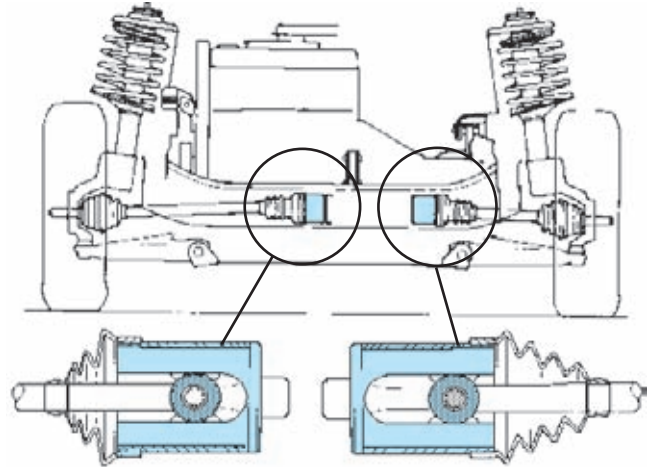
The enlarged views of the inner CV joints show that the engine and transaxle are misaligned; they should be moved toward the right.
